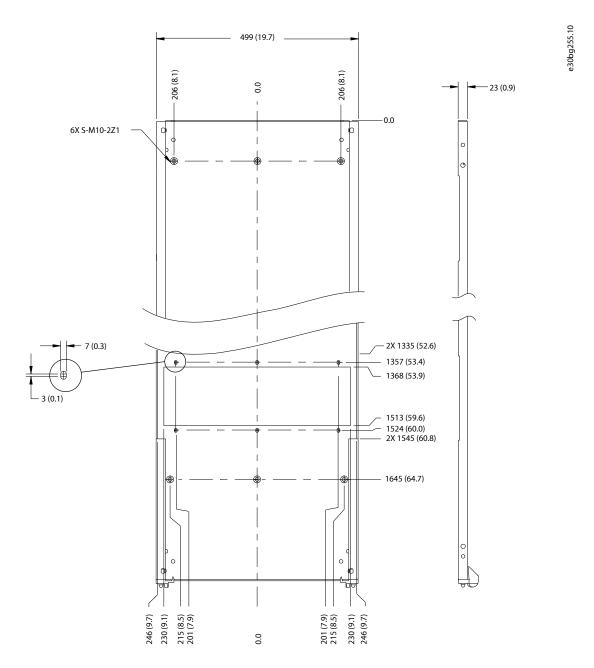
Vent Dimensions for Mounting Plate in 600 mm (24 in) Cabinet
